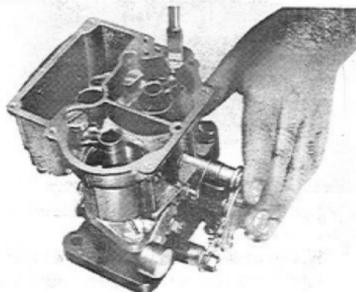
Removing Primary V0574 Main Air Bleeder
